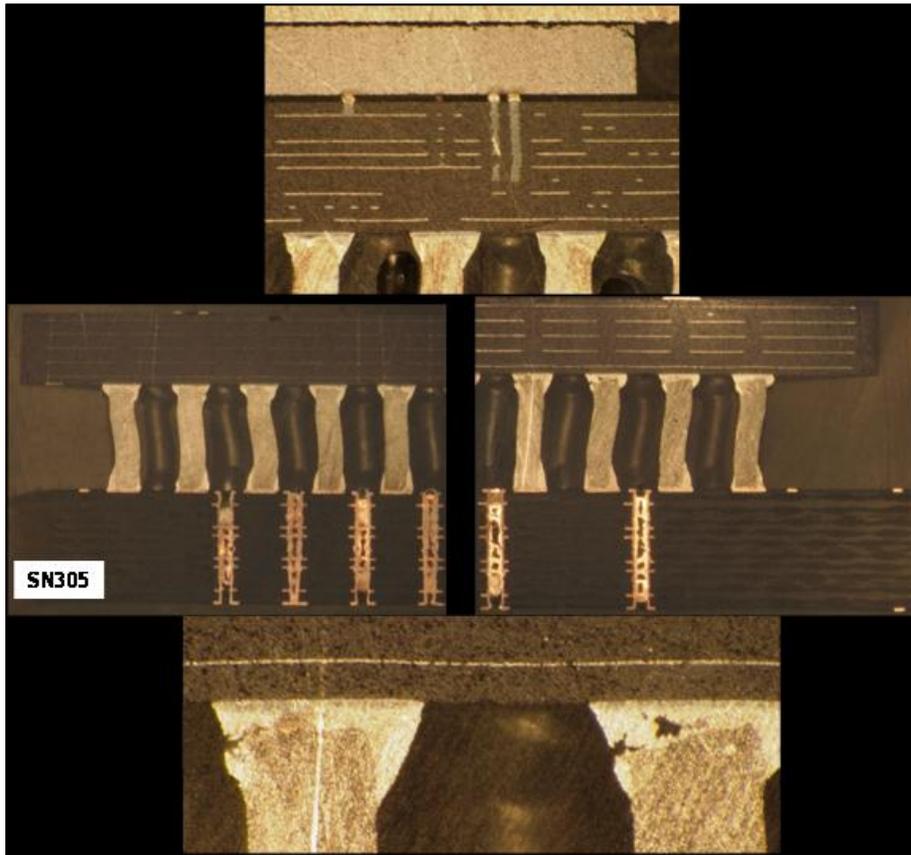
Cross-sectional photomicrograph of the CGA 1144 I/O assembly after thermal cycling.
